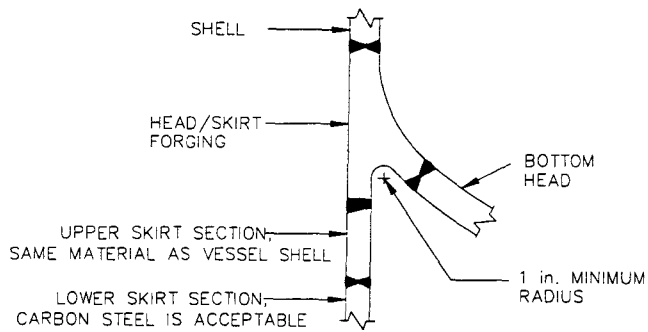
Forged Ring at Skirt-to-Shell Attachment
